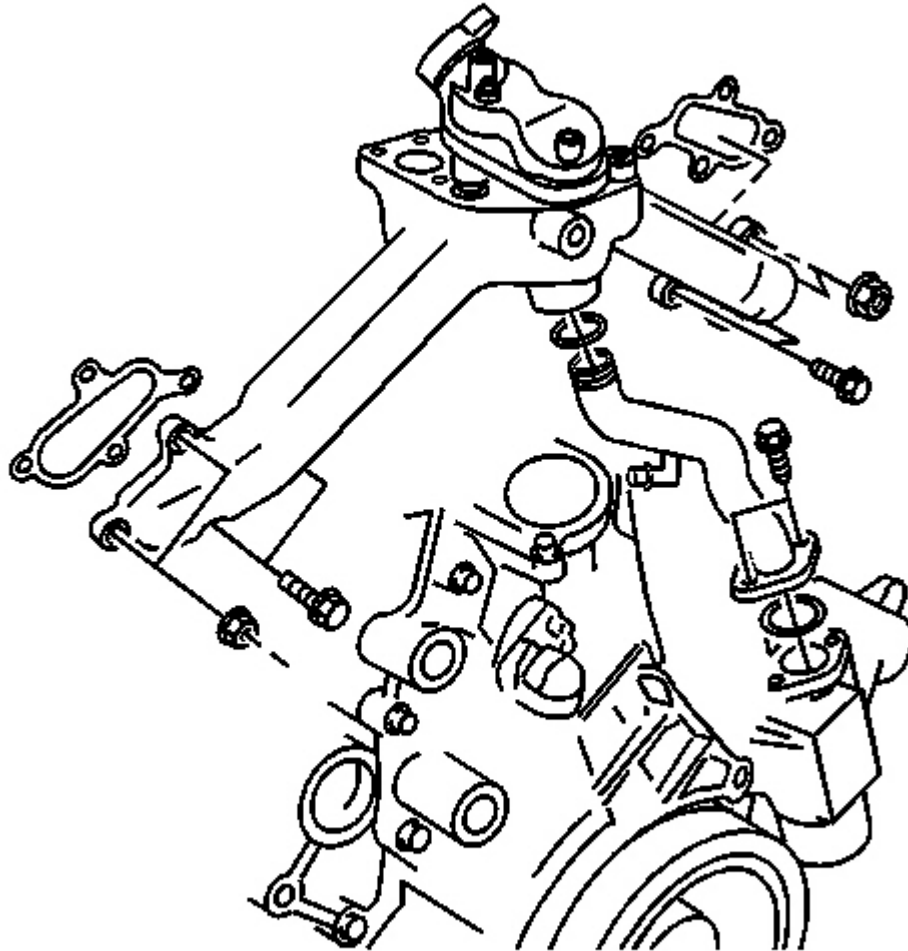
View Of Heater Inlet Pipe, Thermostat Housing & Fuel Filter
